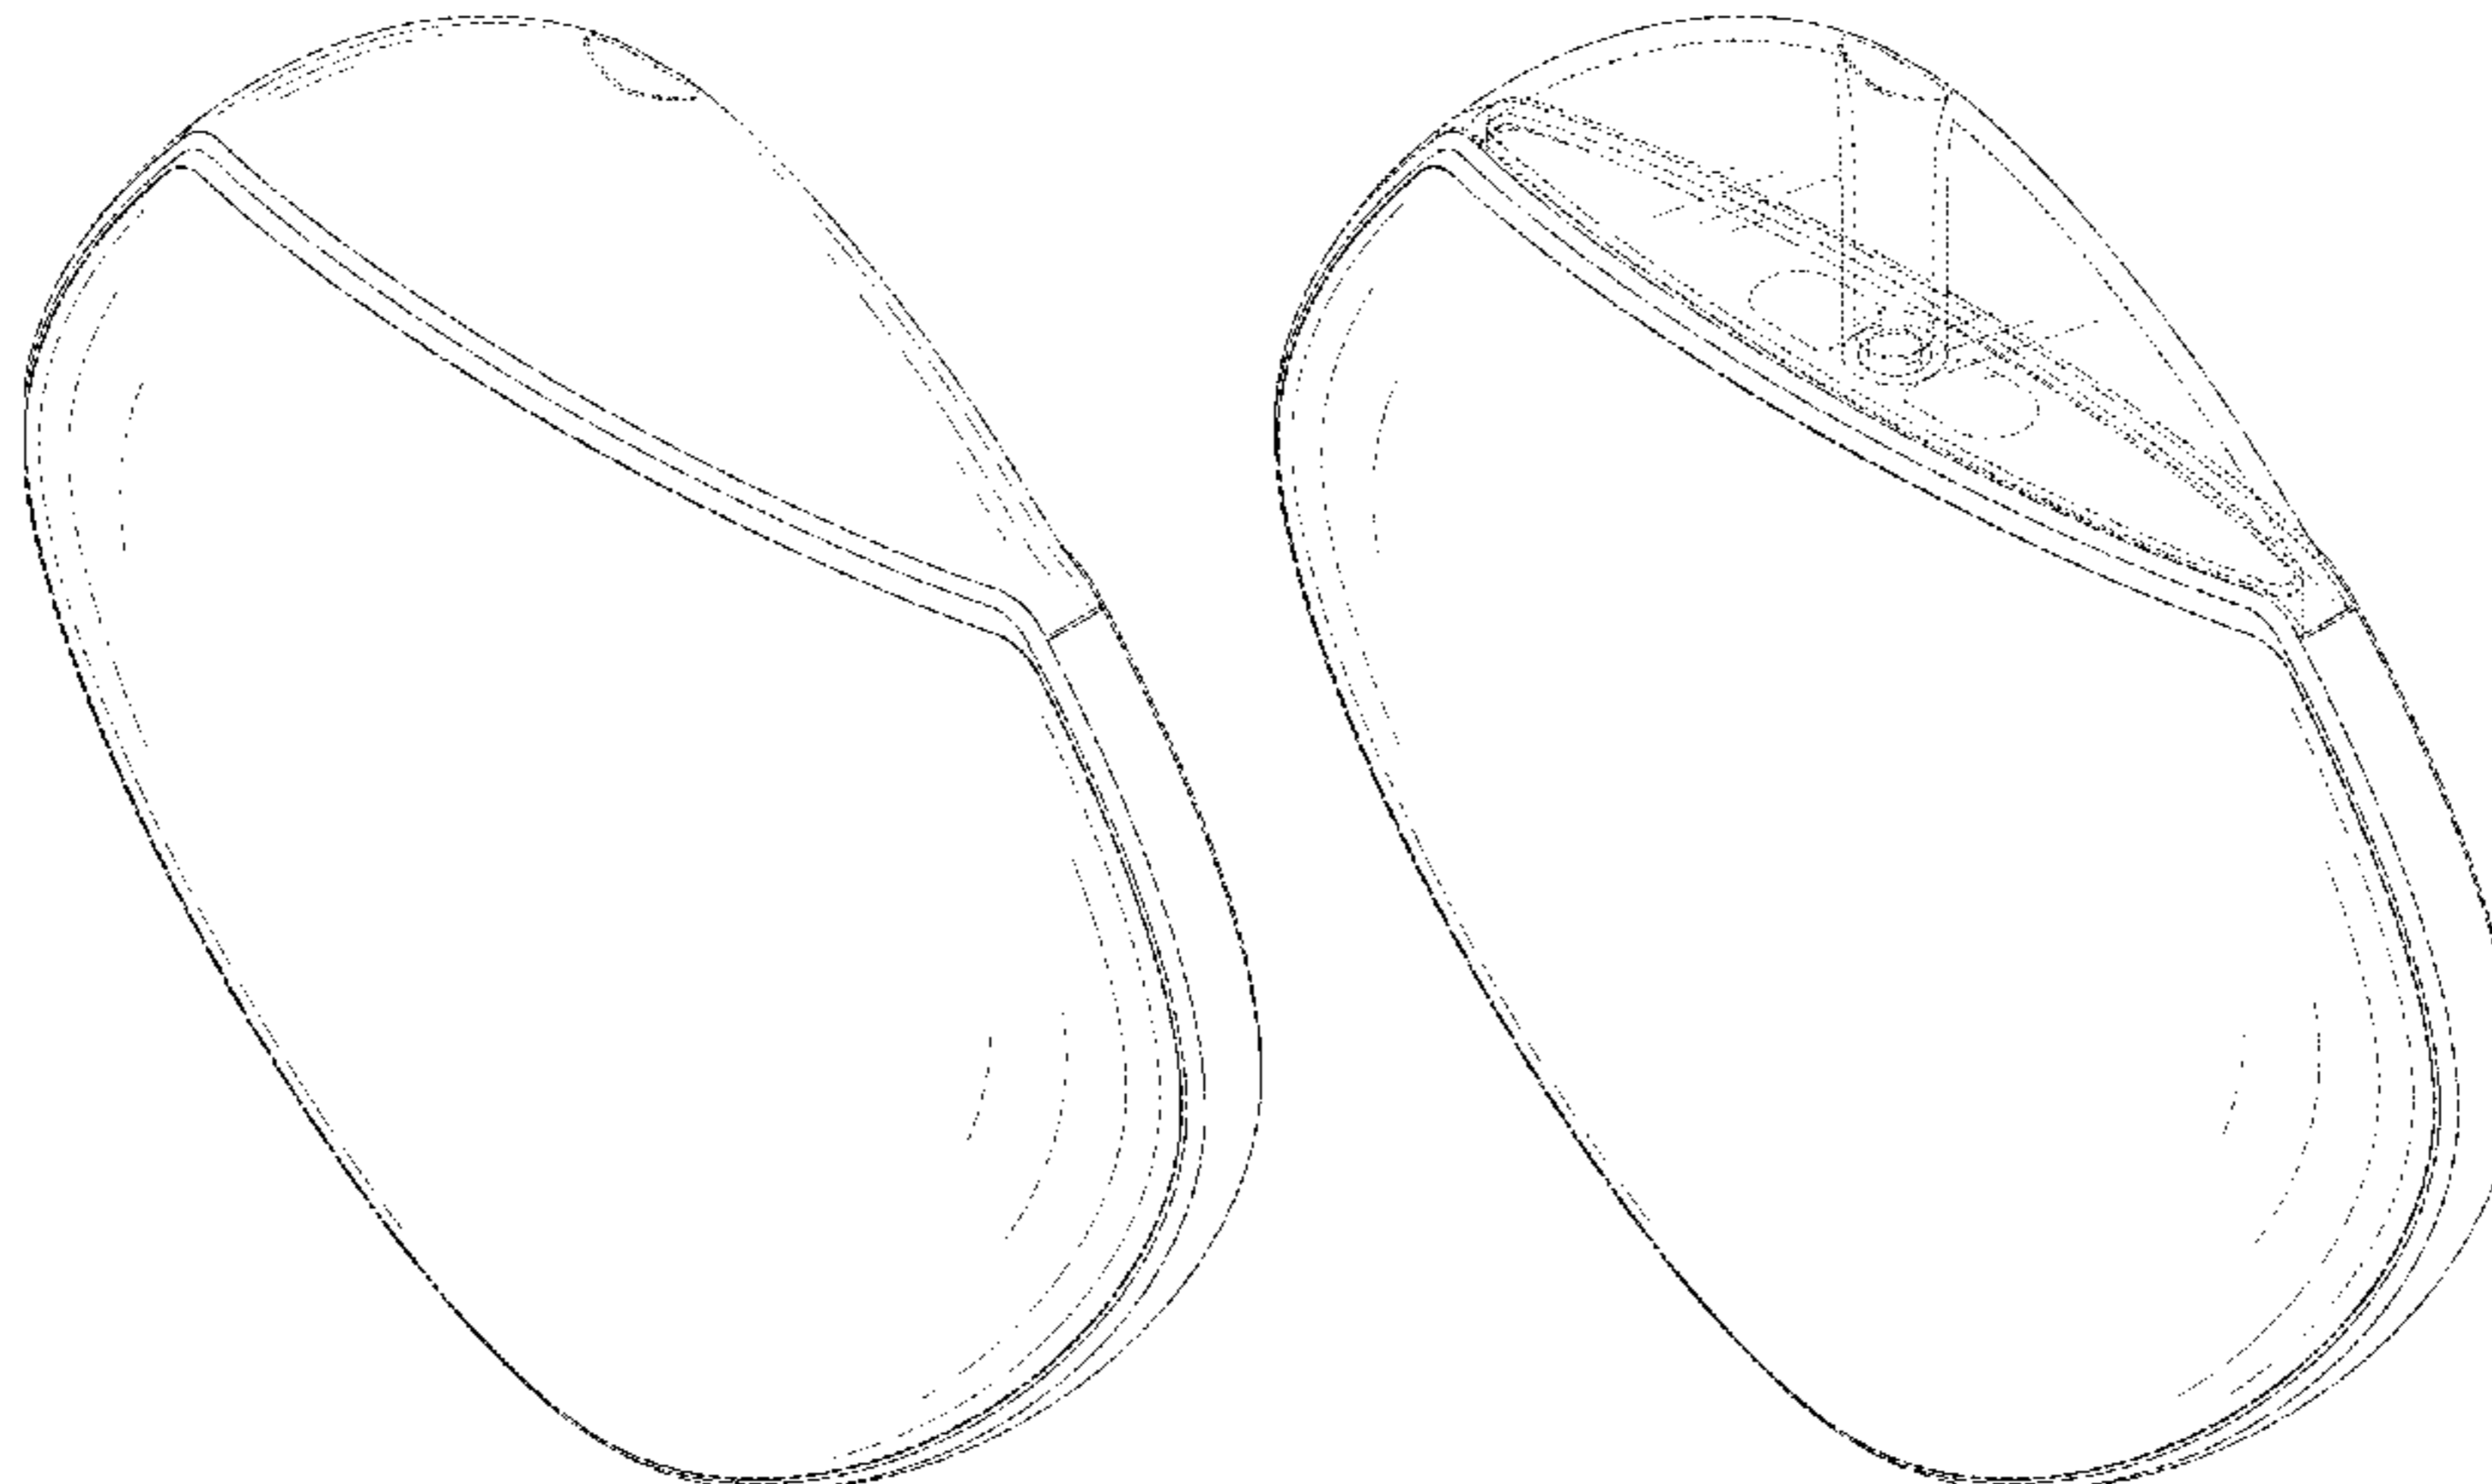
is a perspective view of an electronic atomizing device assembly showing a first component removed from the assembly shown in FIGS. 29-35, for clarity of disclosure;
